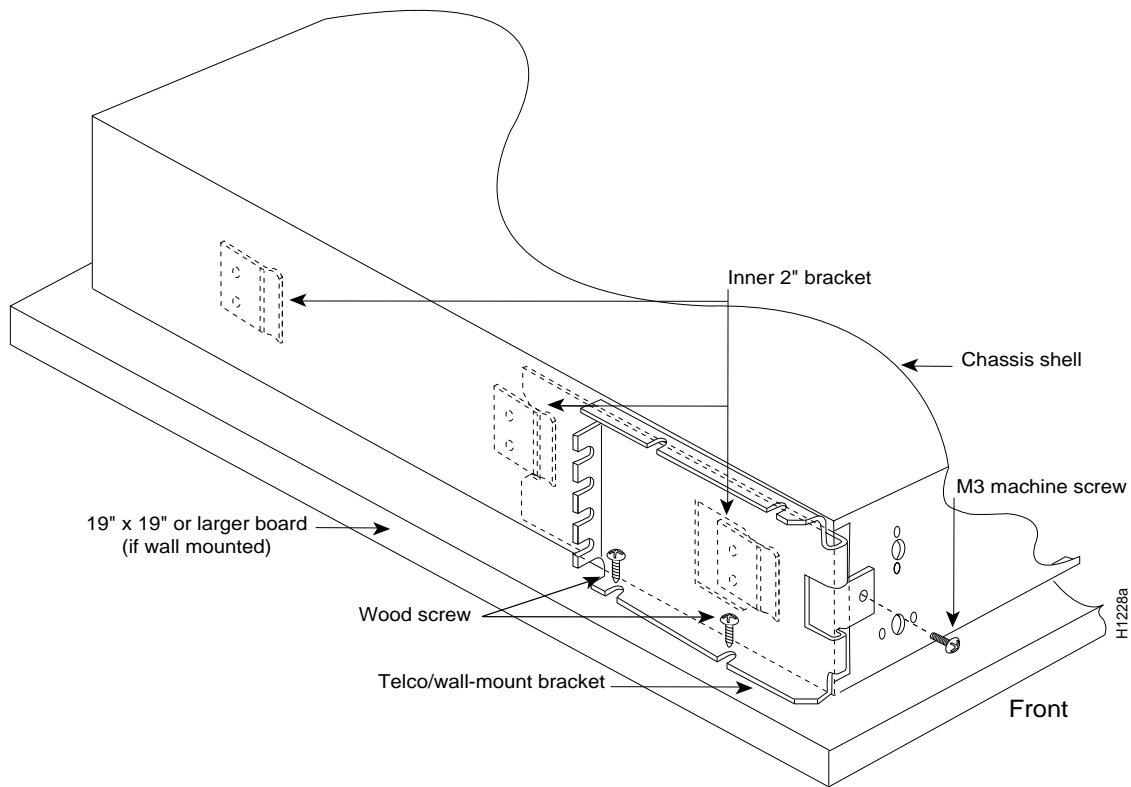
Screw Locations for Telco Rack/Wall-Mount Bracket
